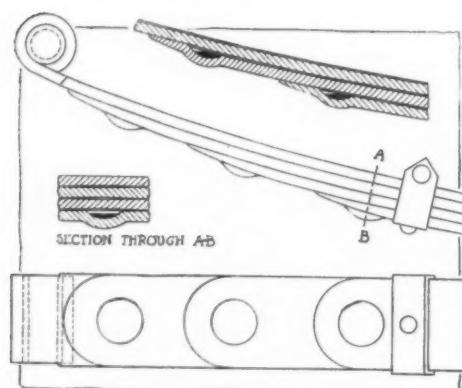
Inter-leaf spring, showing bottom and side views, longitudinal section and cross-section through A-B. The cross-section illustrates the cup construction
